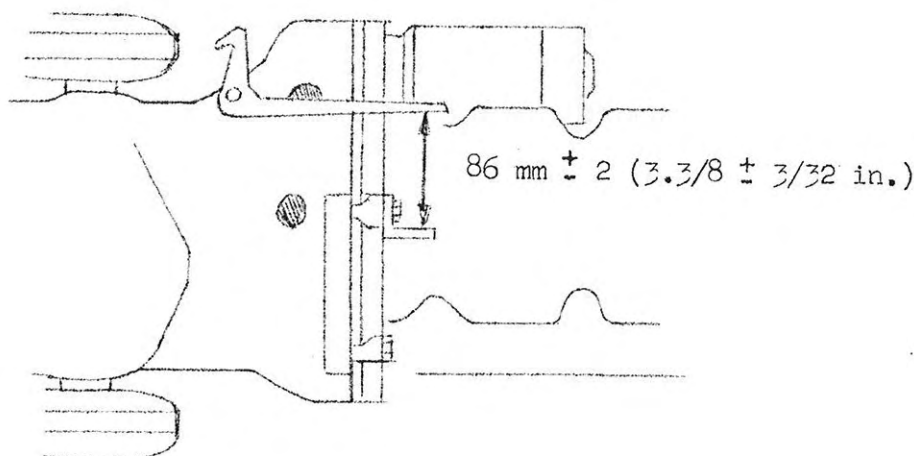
The power unit as seen from below. - The distance between lever and wire attachment bracket should be 86 mm  $\pm$  2, (3.3/8  $\pm$  3/32 in.).
